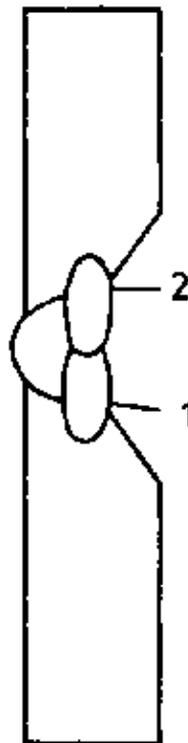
Welding the 1st and 2nd inner passes
